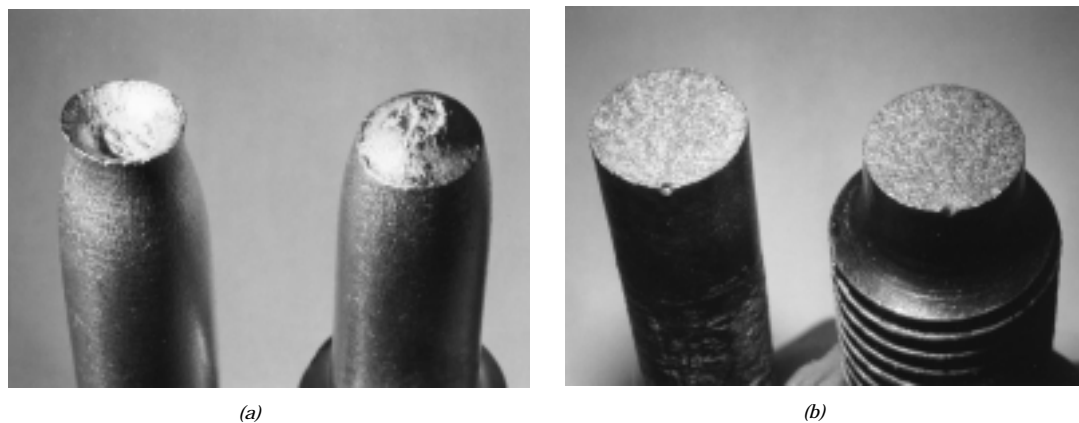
(a) Cup-and-cone fracture in aluminum. (b) Brittle fracture in a mild steel.
